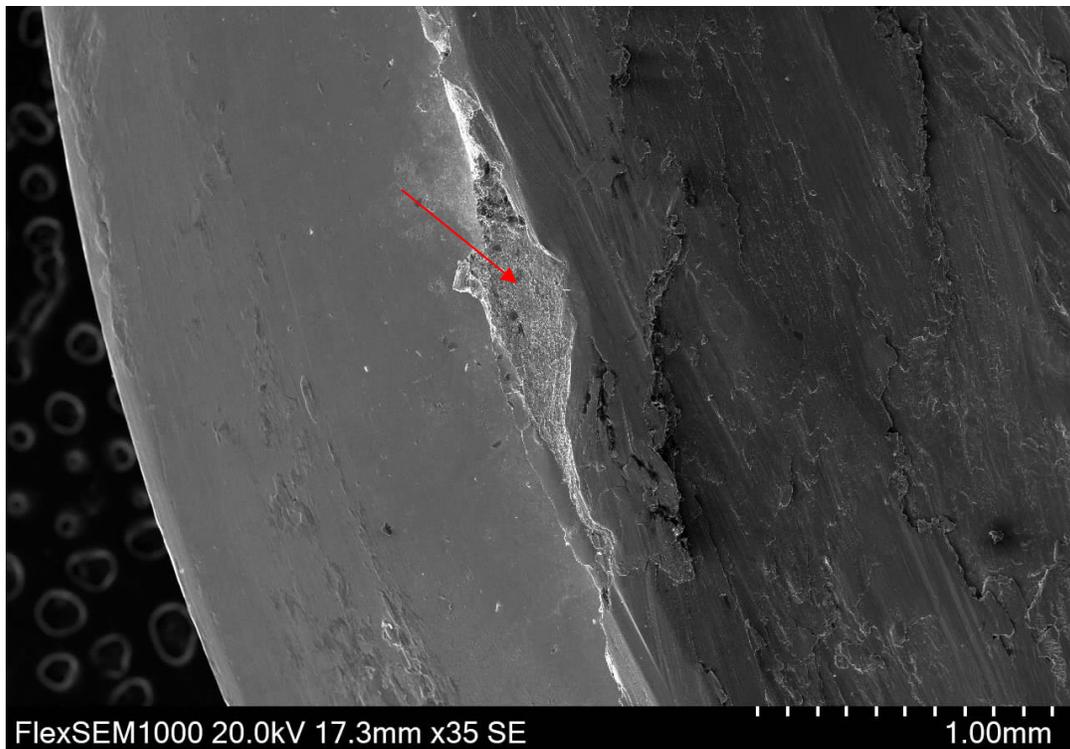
POCKET OF THE THREAD FACE – FRACTURE SURFACE BORDER, BOLT C5
